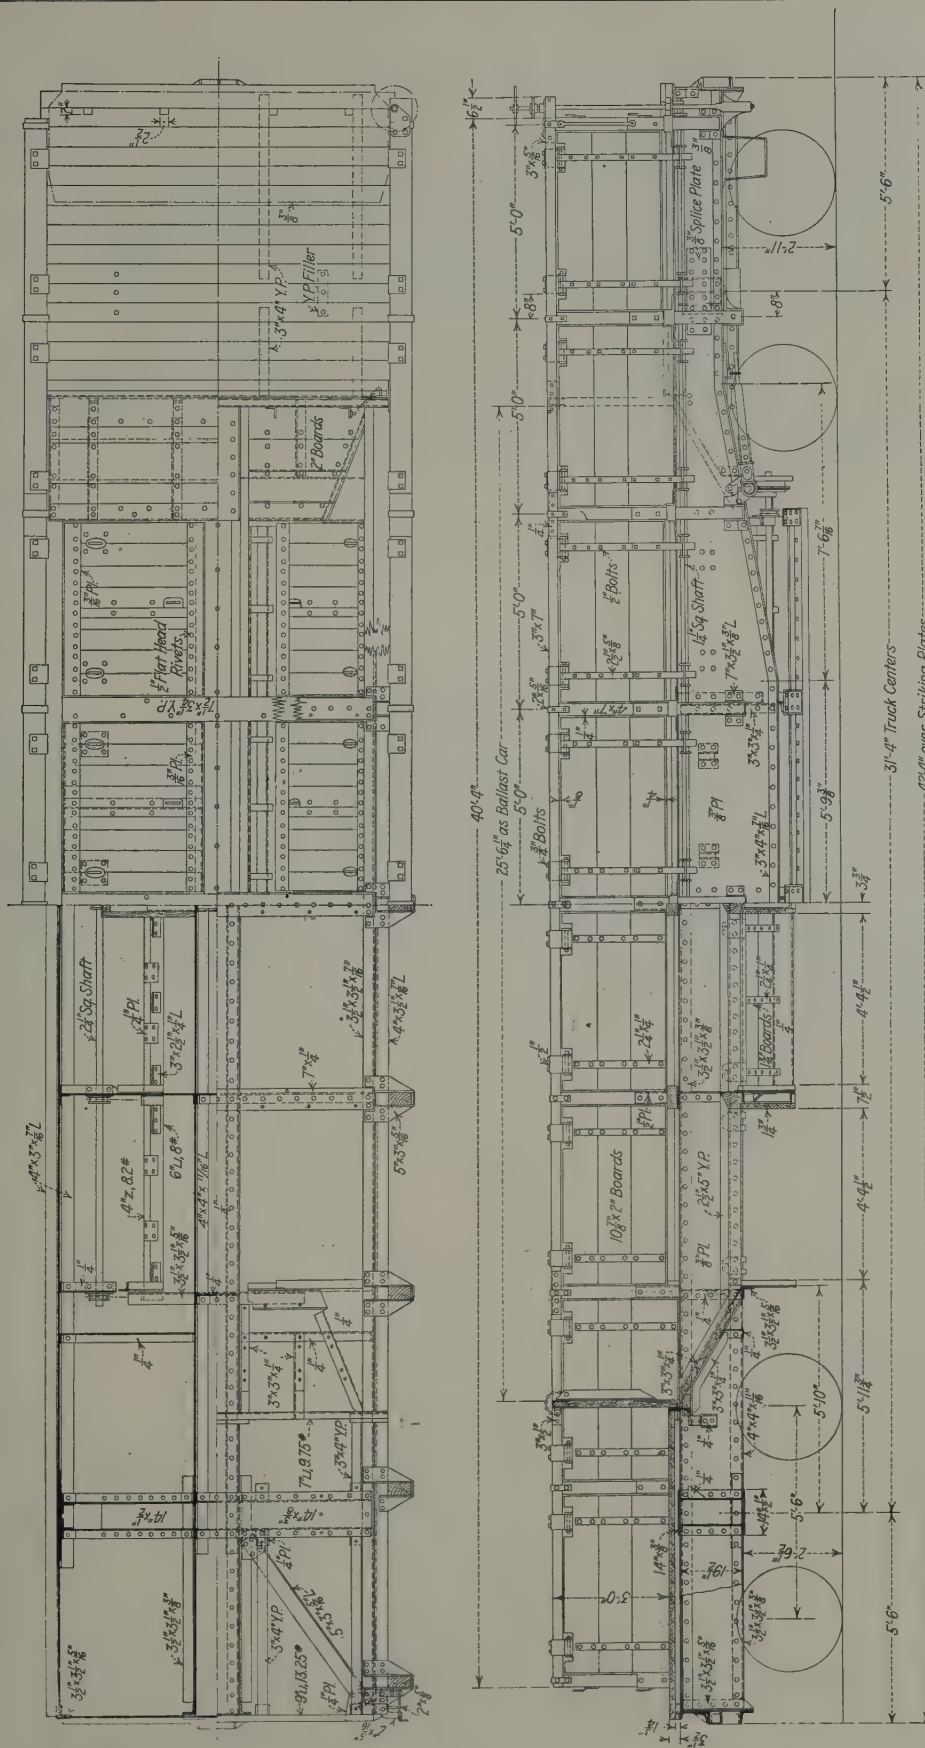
Steel Frame 50-Ton Plow Gondola or Ballast Car. Builder, Enterprise Railway Equipment Company.
